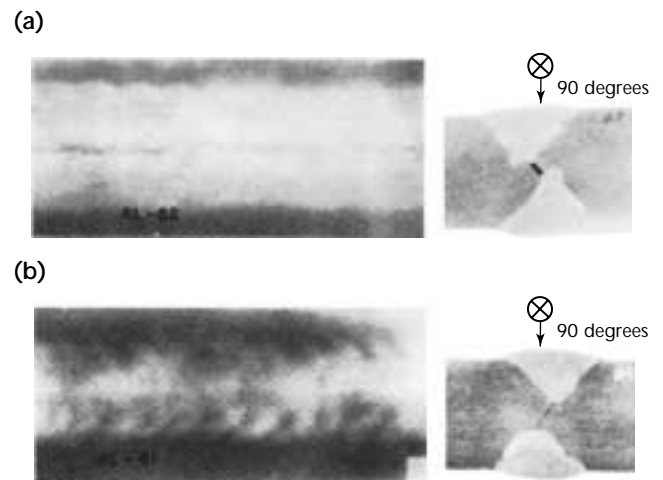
Examples of lack of fusion correlated with cross sections of aluminum welds: (a) lack of fusion, resulting from welding gun misalignment; (b) lack of fusion, resulting from low current setting.<sup>24</sup>
